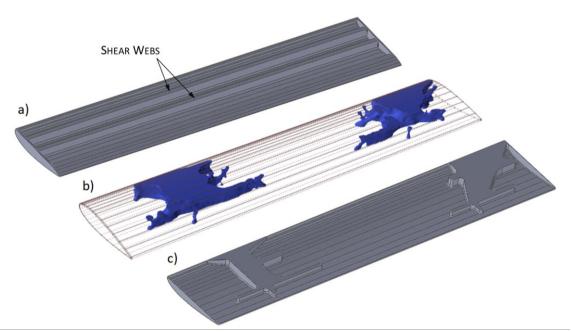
Benchmark, topology optimized, and final CAD designs. a) Cross-section of the blade showing the benchmark shear webs. b) Transparent view of the blade showing the topology optimized internal support. c) Cross-section of the blade showing the final CAD design (simplified from the topology optimization result).
